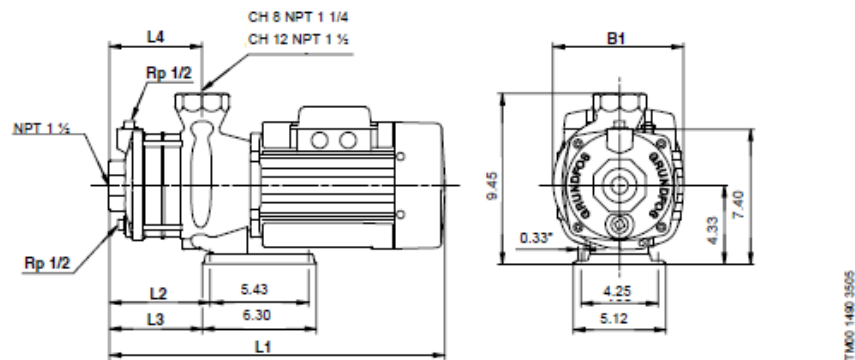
Dimensional sketches CH, CHN 8 and 12 with ML 90 motor
